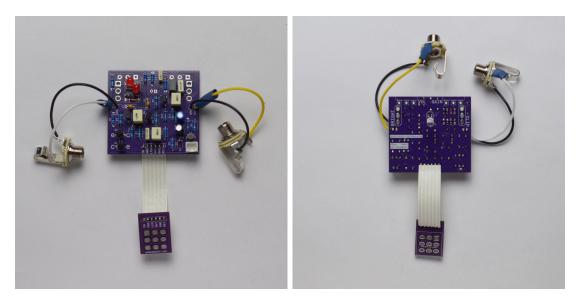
Audio jacks soldered on the left, LED placed but not soldered on the right
